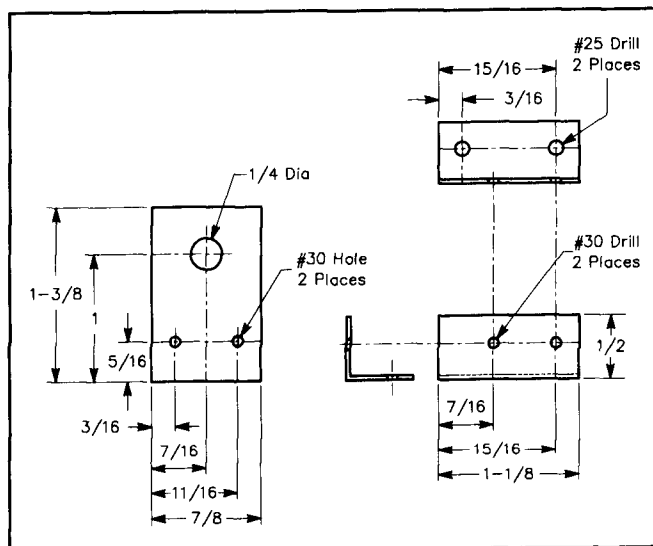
C1 mounting bracket is made from 0.062 X 1/2-in. aluminum angle or 0.062-in. aluminum sheet. The mounting insulator is made from 1/16-in. G10 circuit-board material from which the copper has been removed.
